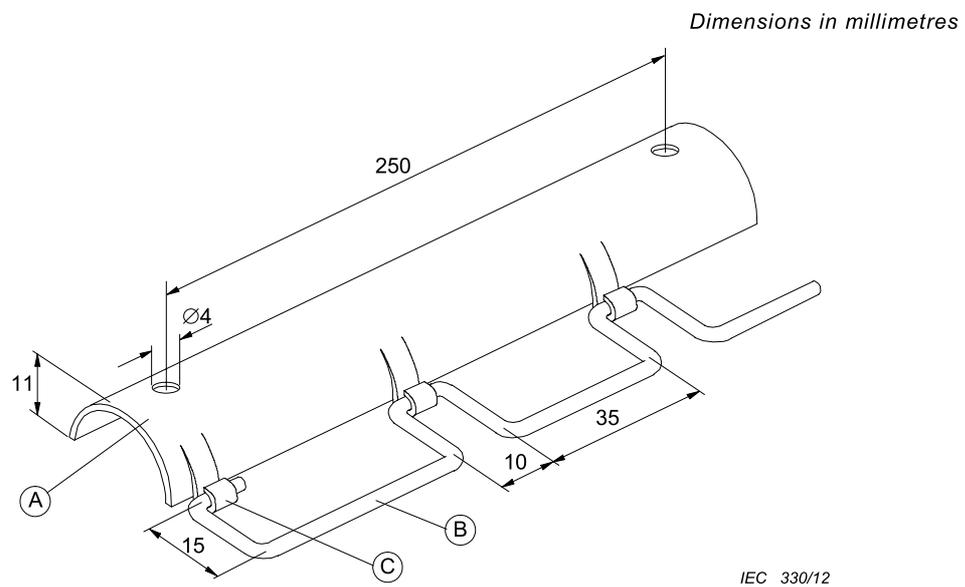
Equipment for the mechanical strength test of blankets
